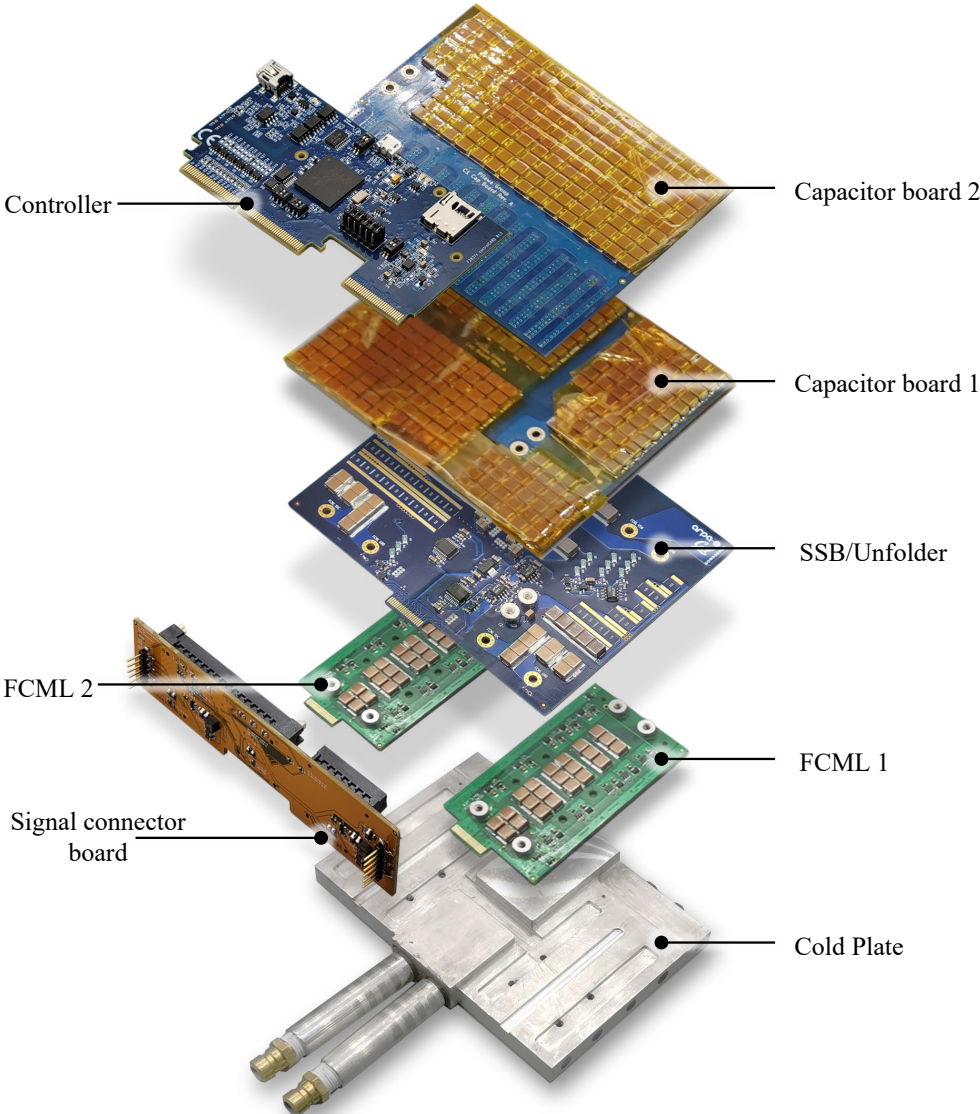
Exploded view of the hardware assembly. (Image created in collaboration with Zitao Liao)
